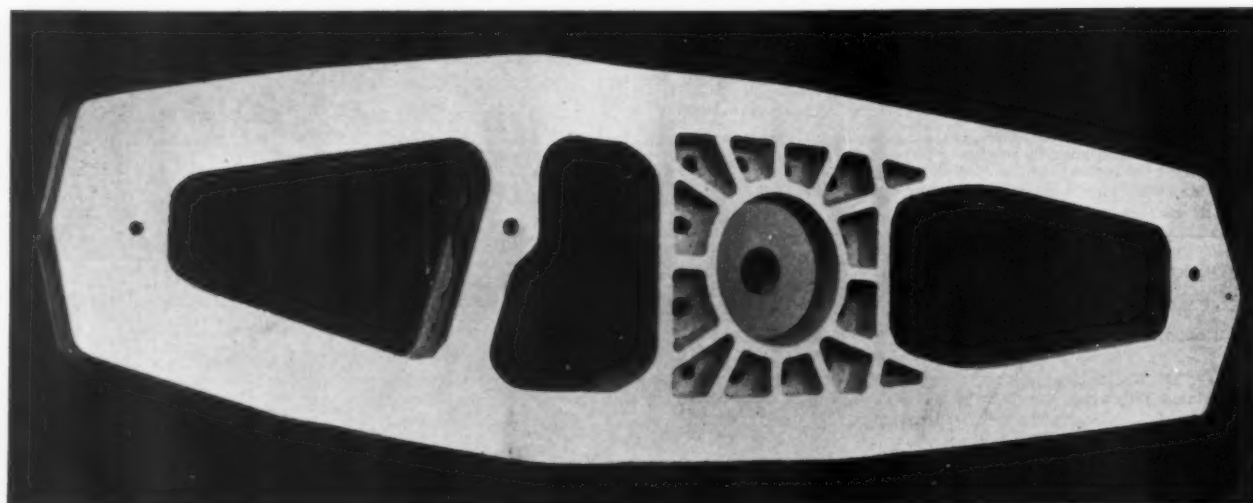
Huge phenolic casting for an aircraft assembly fixture
